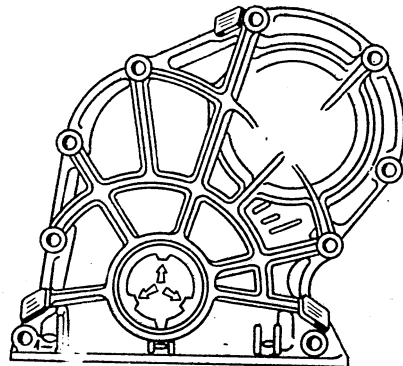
Camshaft Drive Cover. Arrows Show Lugs for Aligning the Cover with Crankshaft Pulley Hub
